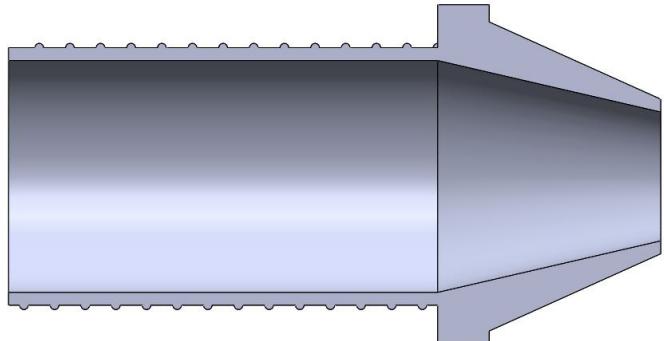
A 15mm outlet nozzle with 50mm M30 thread
